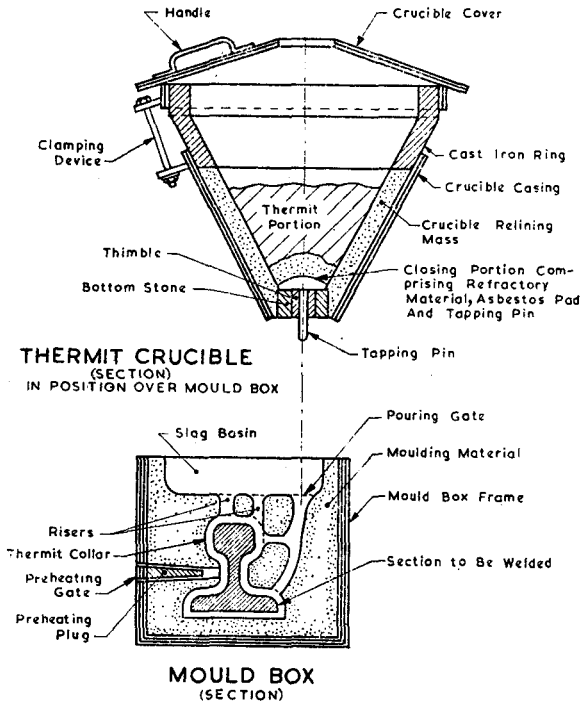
SET UP OF APPARATUS FOR A THERMIT FORM OF WELD
